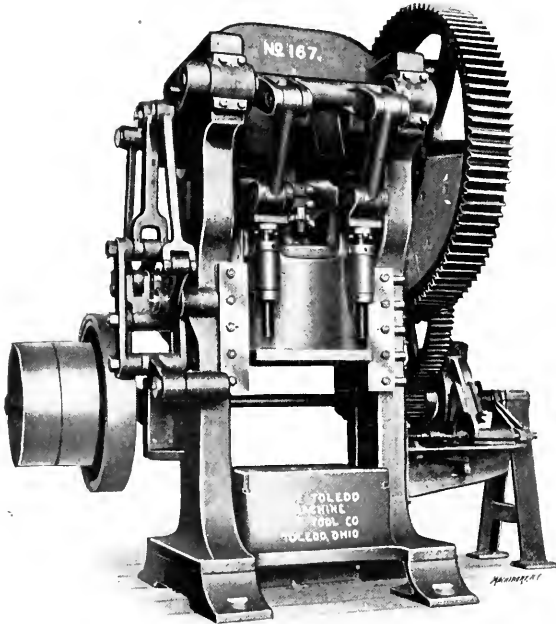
Drawing Presses with New Mechanism for Operating Blank Holder.
